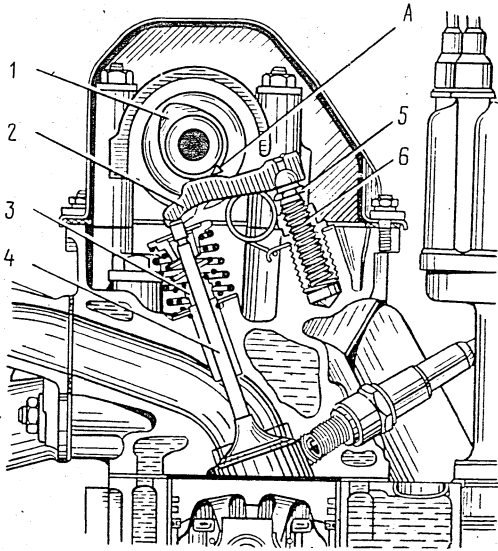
Cylinder Block and Head. Section Through Inlet Valve:
